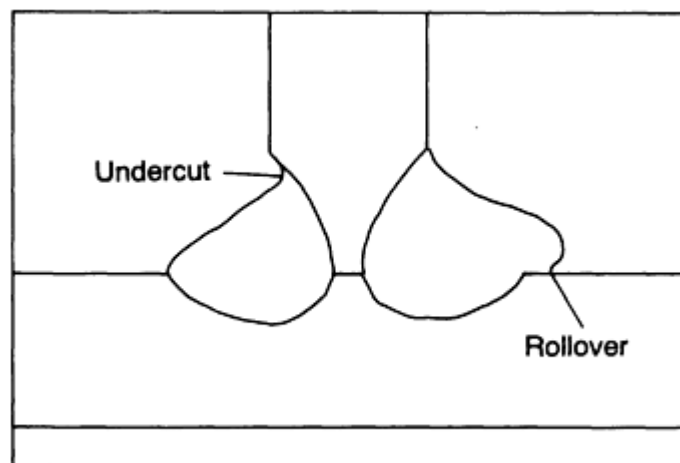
UNDERCUT IN VERTICAL LEG OF FILLET WELD AND ROLLER IN HORIZONTAL FILLET WELD
